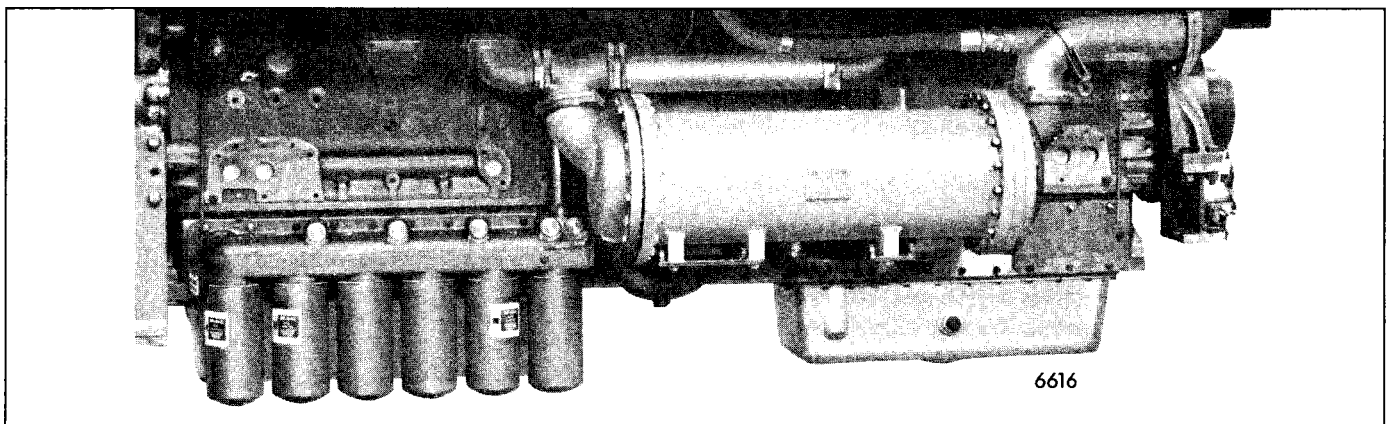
Tube and Shell Oil Cooler Mounting (16V-149 Engine Shown)
